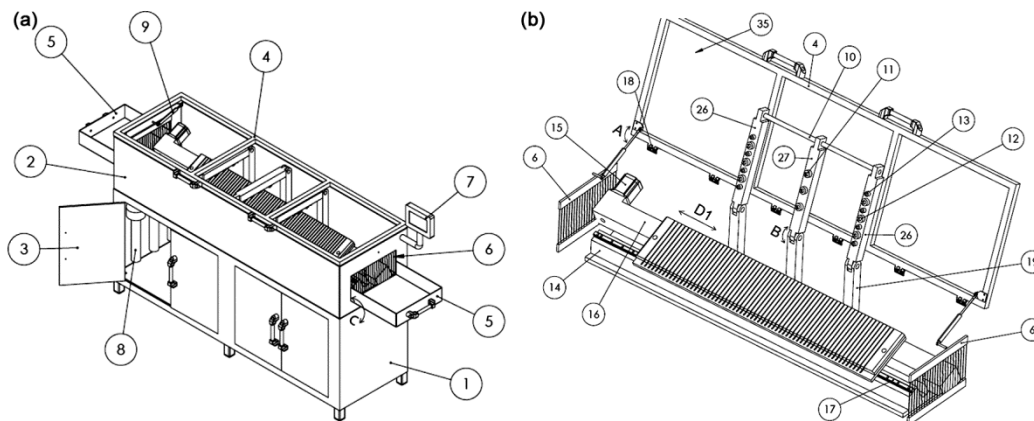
Schematic views of the new-designed machine: (a) top view, (b) open view
